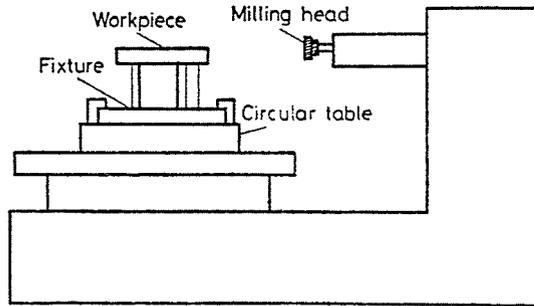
Connection between workpiece, clamping fixture and milling machine
